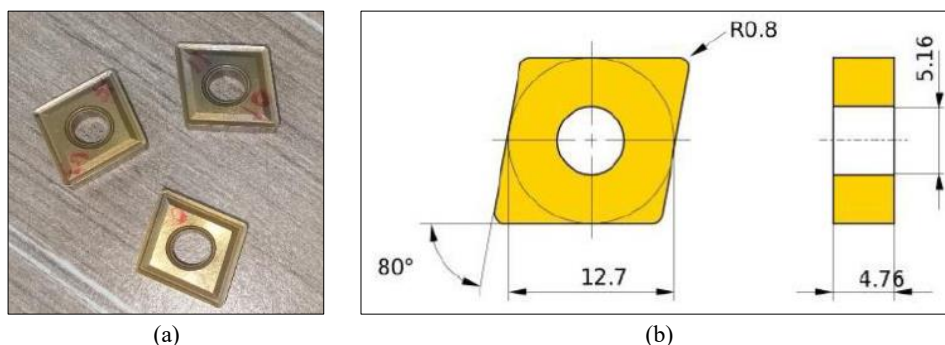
(a) Carbide cutting tool and (b) specification of CNMG120408.
